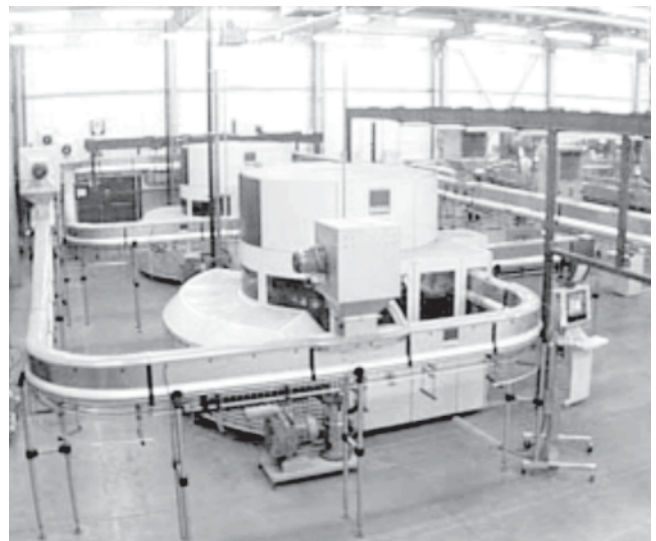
Two rotary PECVD bottle coating machines integrated into a production line (courtesy of Sidel) [22].
